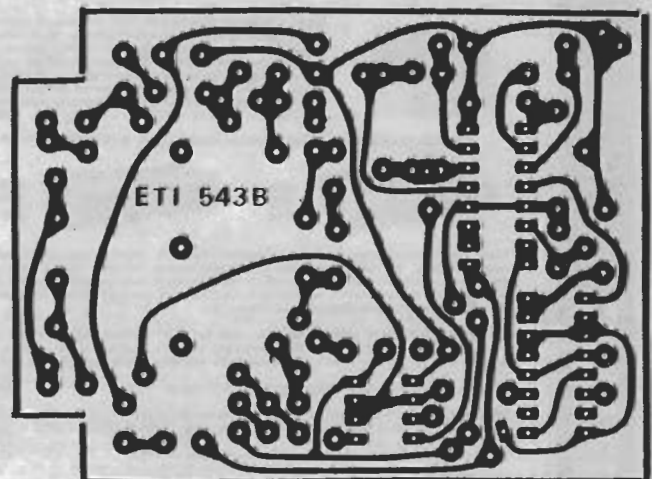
Printed circuit pattern for the timing board. Full size 83 x 61mm
